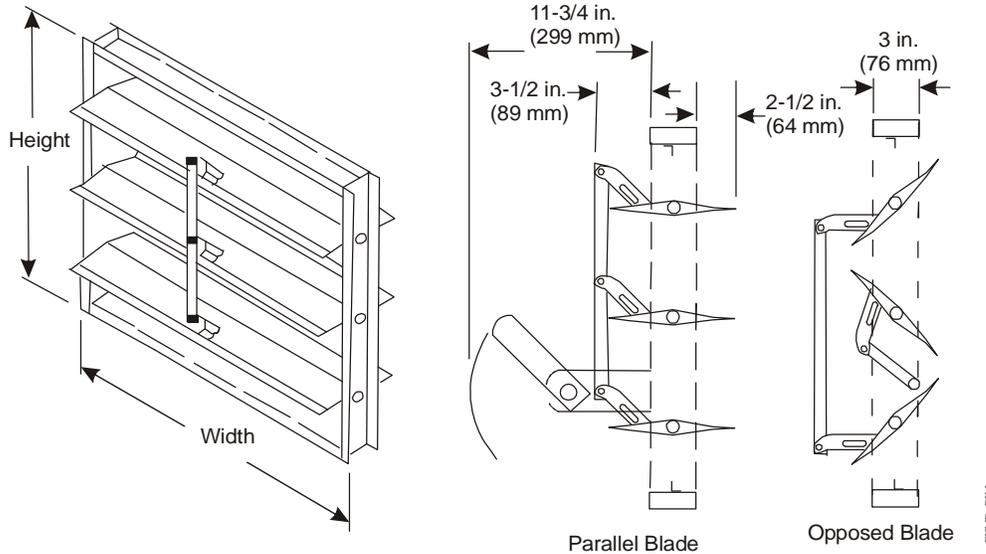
ID-1210, ID-1230, and ID-1400 Damper Dimensions, in. (mm)
